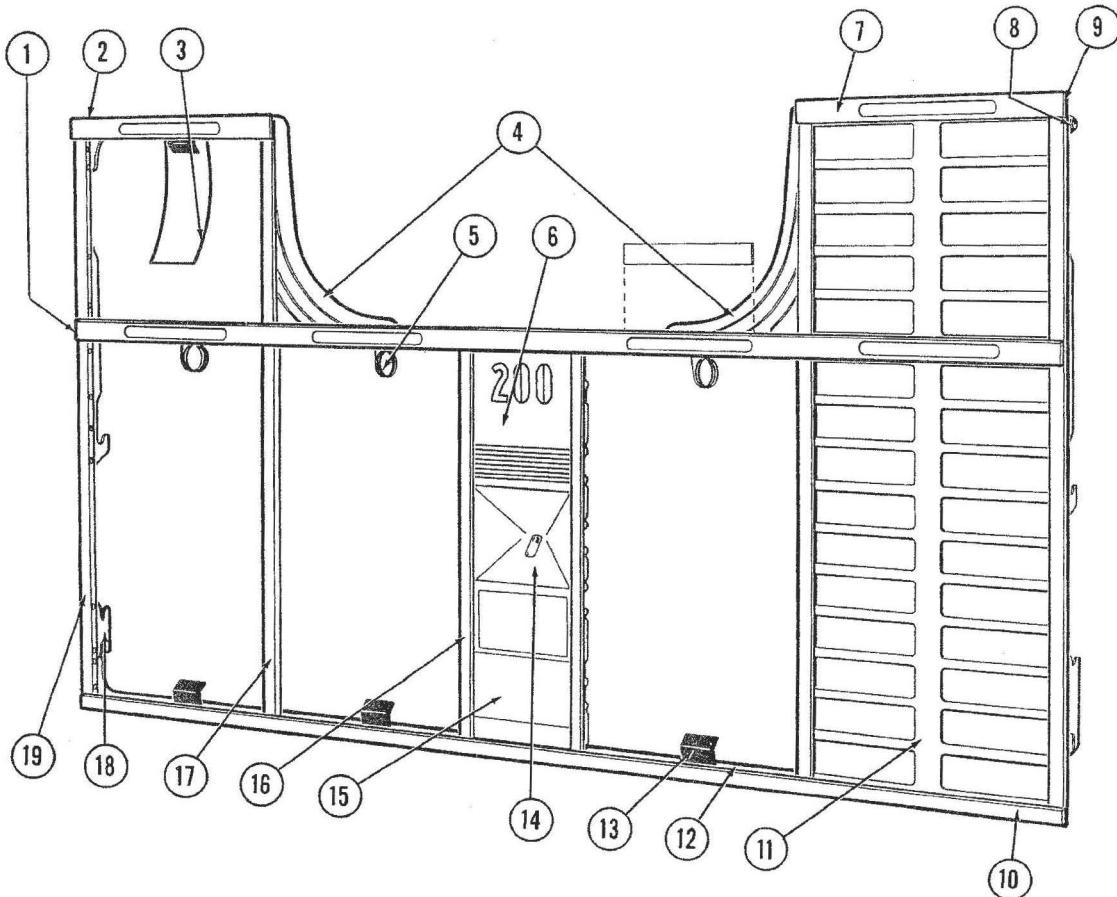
PROGRAM HOLDER ASSEMBLY 2400
